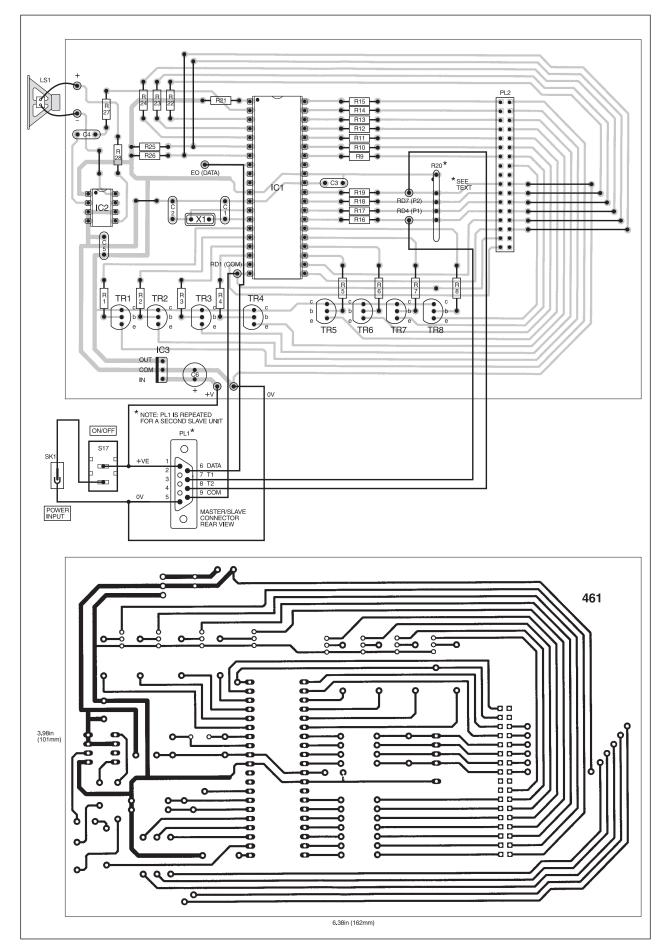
Control printed circuit board component layout, full-size copper foil master and wiring to off-board components.
